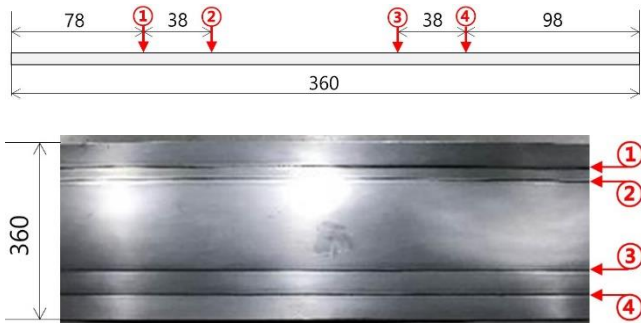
Local softening sections and heat treated blank on SPFC1470 UHSS sheet (unit : mm)
